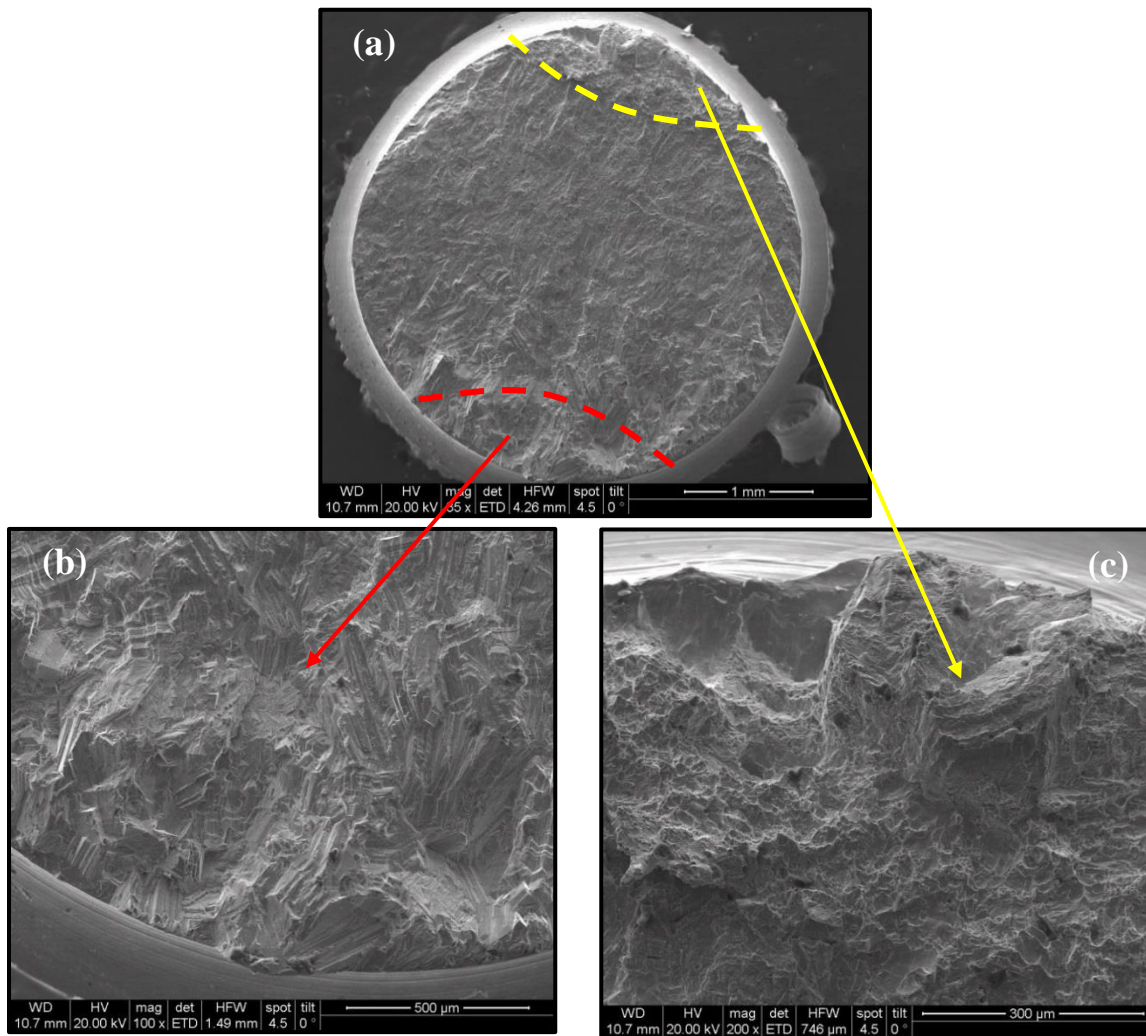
Typical fatigue fracture surface of U-grooved bulk L605 sample failed at  $\frac{\Delta\sigma}{2} = 307$  MPa,  $N_f = 3.69E+06$
